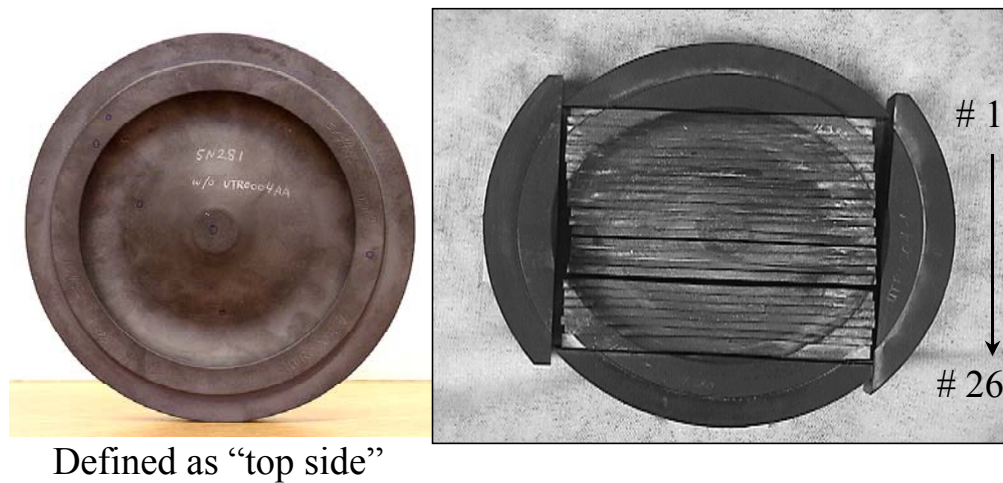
Photos show (a) the SN281 microturbine rotor blank and (b) sample slices machined from rotor.
